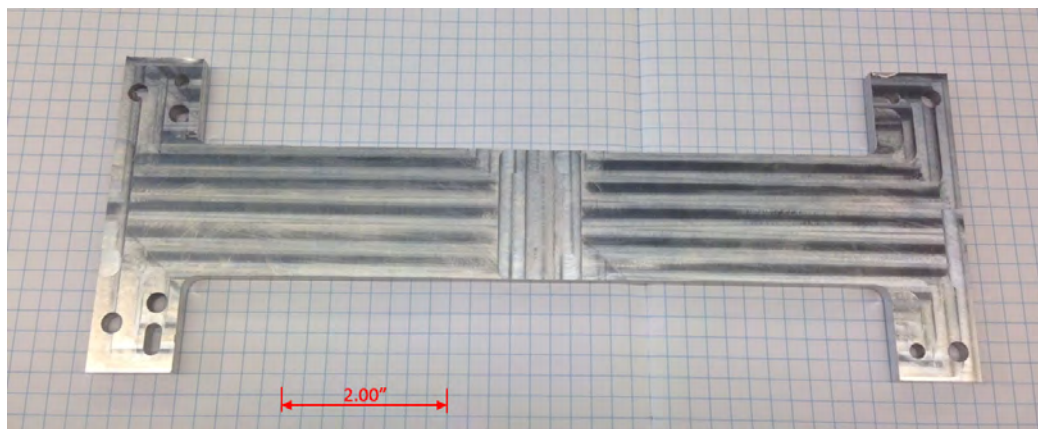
Final large geometry part produced following the electrical discharge machining of the composite ends.
